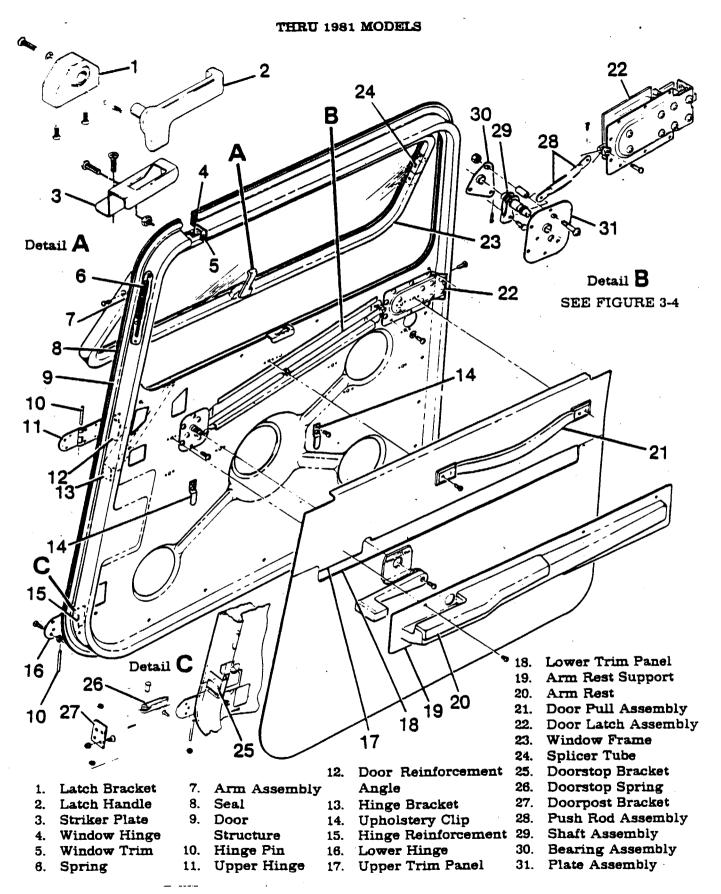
Right Cabin Door Assembly (Openable Window)
